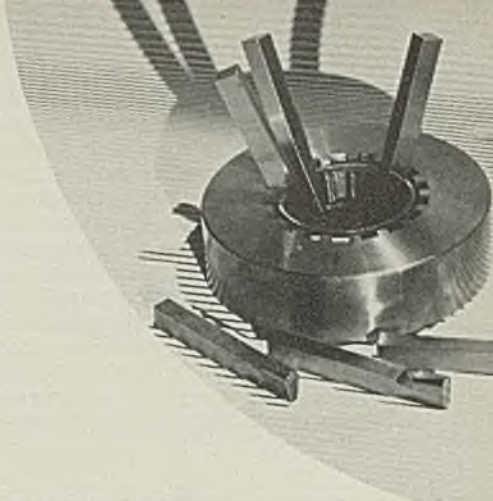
Multiple punch and die assembly for coining or "winging" bearing cage pockets to conform to contour of tapered rolls
